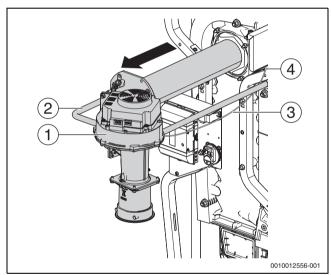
Pull out the burner (illustration shows boiler rating 200-300 kW)
